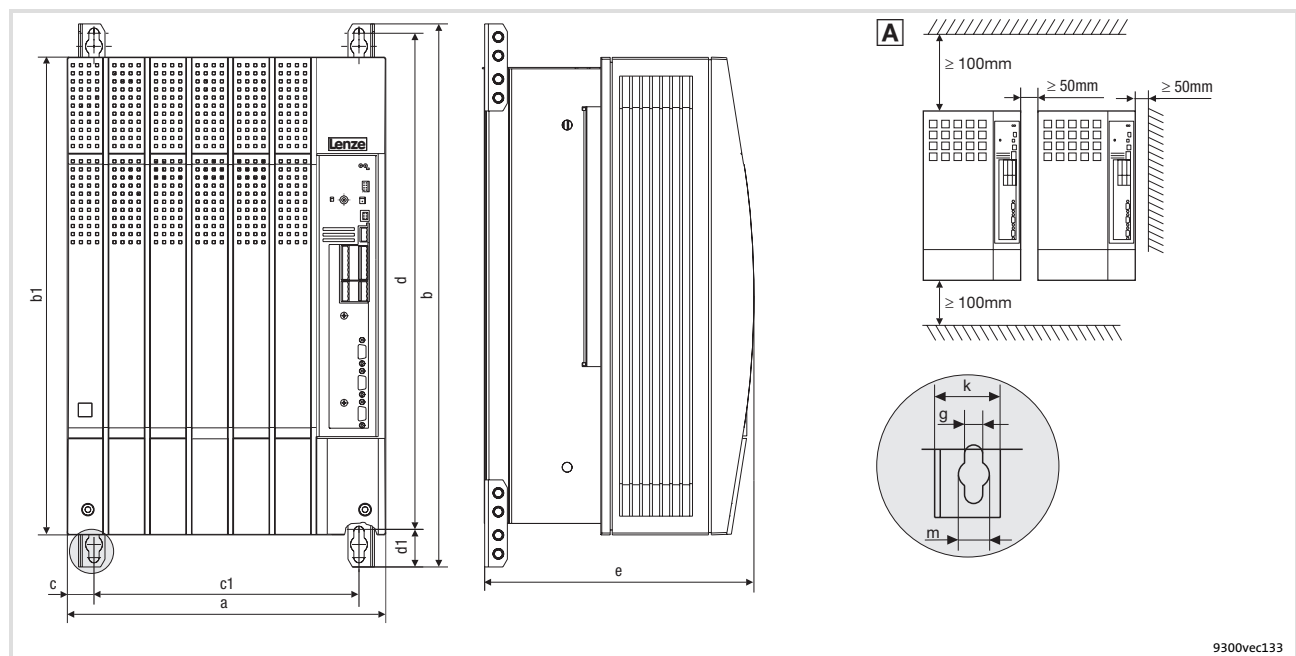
Standard mounting with fixing brackets 45 kW
